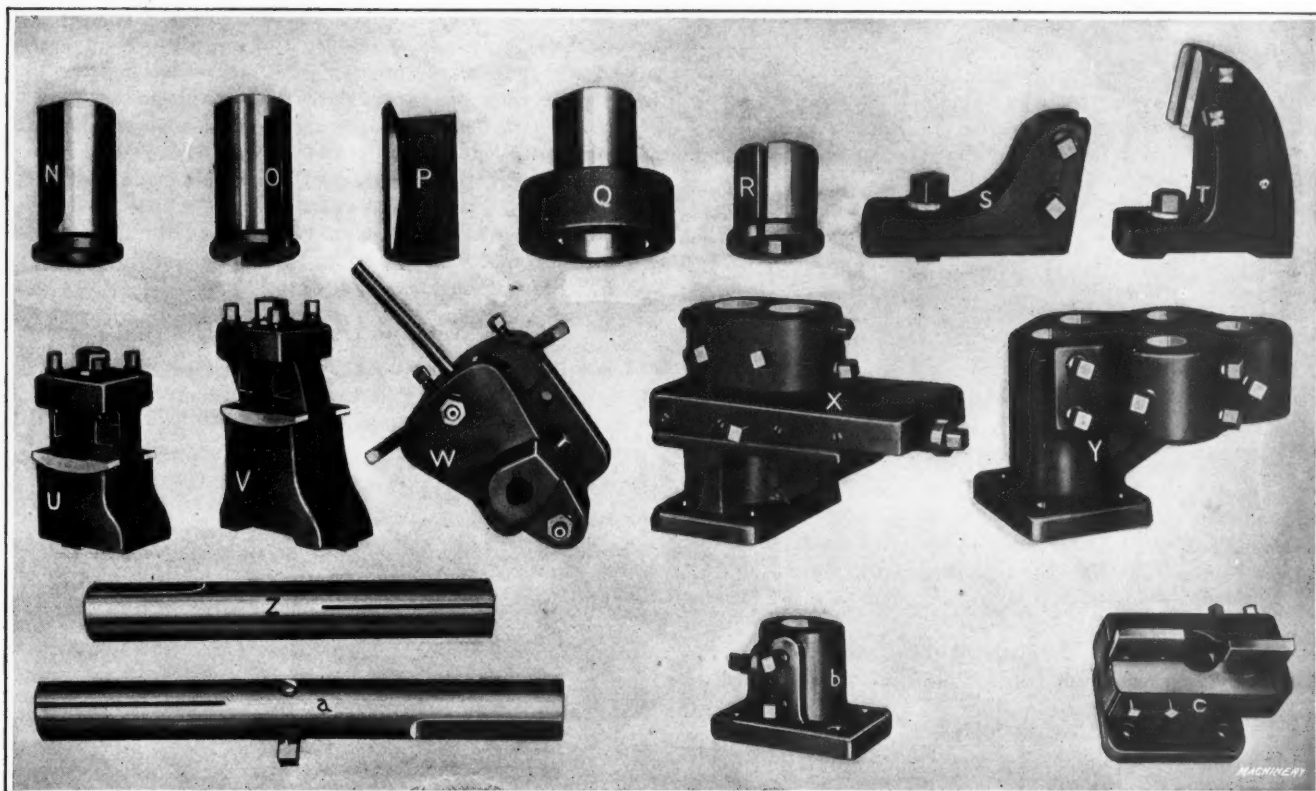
N to R, Adapters; S and T, Forming Tool-holders; U and V, Double Tool-holders; W, Recessing and Back-facing Tool; X, Tool-slide for Use in recessing and back-facing; Y, Multiple Turning Head; Z, Pilot Bar; a, Boring-bar; b, Adapter; c, Facing Tool
